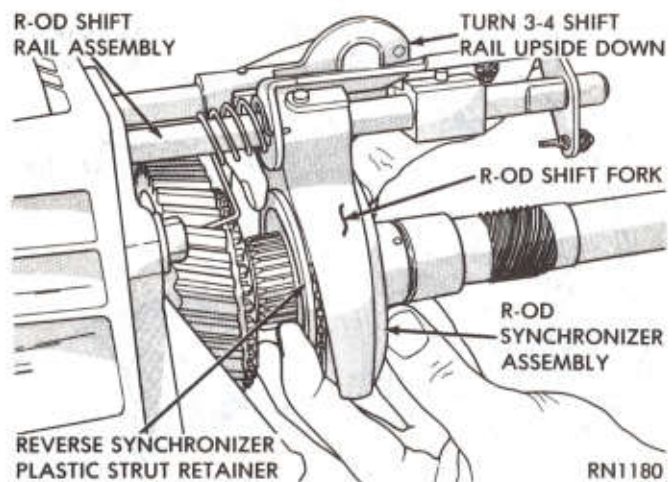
R-OD Synchronizer, Fork, and Rail Assembly
